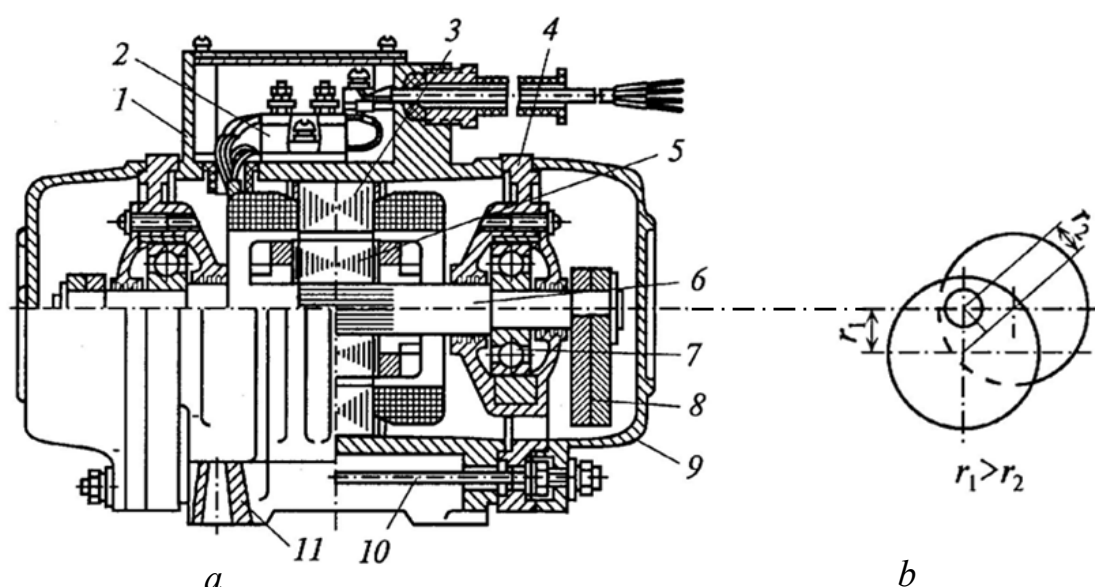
Electromechanical unbalance single-shaft vibrator ИВ-70 with a circular oscillations: *a* – general view; *b* – regulation scheme of unbalance; 1 – jar; 2 – terminal-block box; 3 – stator winding; 4 – boards; 5 – rotor; 6 – shaft; 7 – bearing; 8 – unbalances; 9 – lids; 10 – stud; 11 – installation palms
